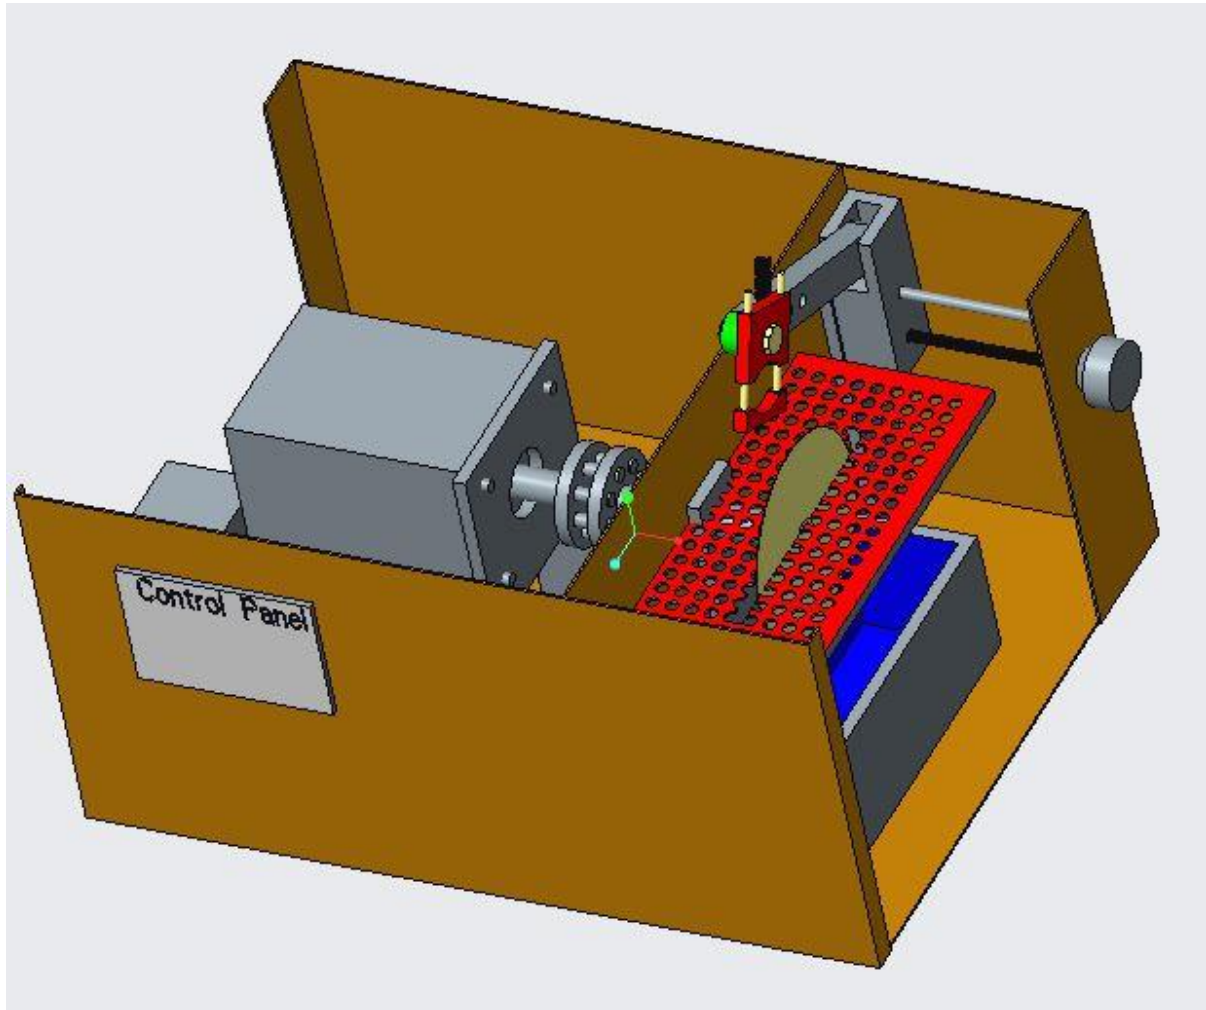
CAD Model of Diamond Disc Precision Cutting Machine
